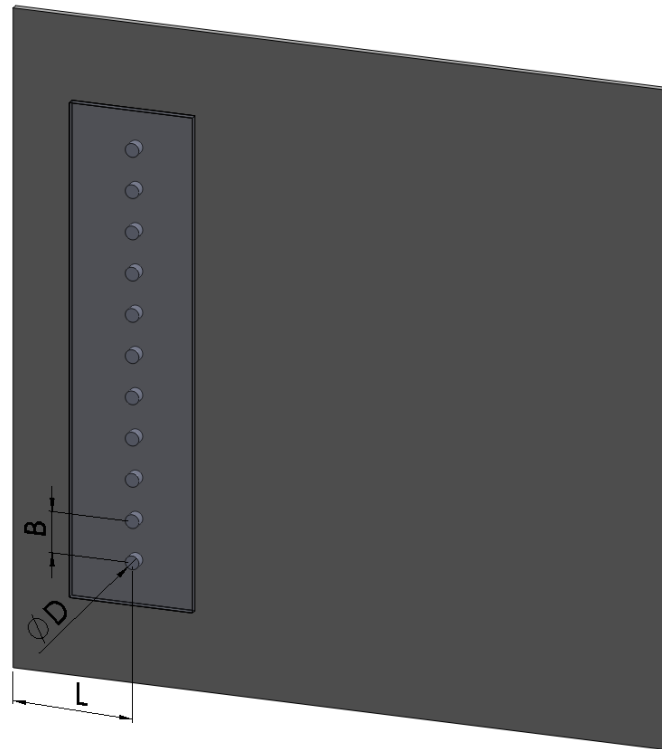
Sandwich panel with one column scatterers with retaining plates
